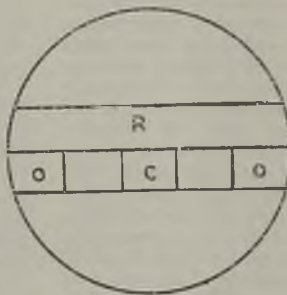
PLAN OF BILLET, SHOWING METHOD OF SECTIONING FOR TESTS. KEY: R = ROLLING SPECIMEN; O = OUTSIDE TENSILE SPECIMEN; C = CENTRAL TENSILE SPECIMEN.
